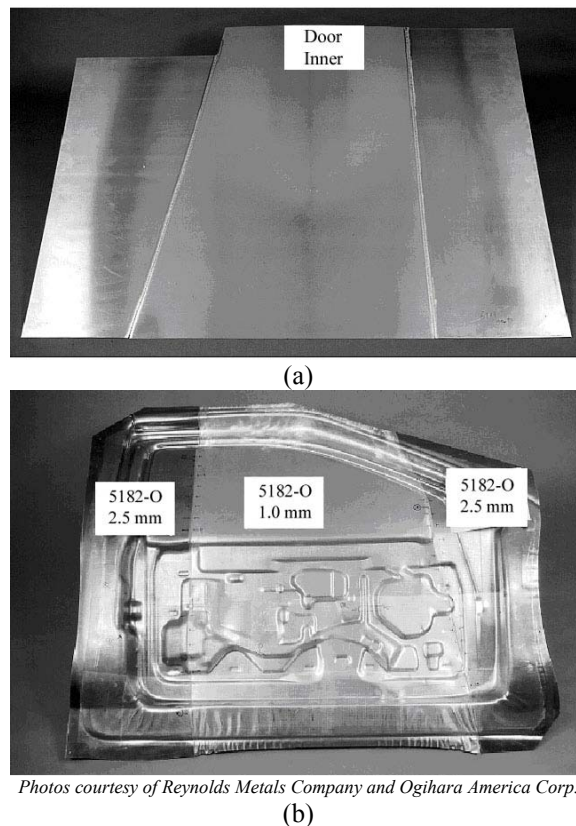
(a) A TWB viewed in the as-welded condition, ready for submission to the stamping process. The shape shown is typical for a door inner stamping operation. (b) Aluminum TWB after stamping to produce a door inner panel.
